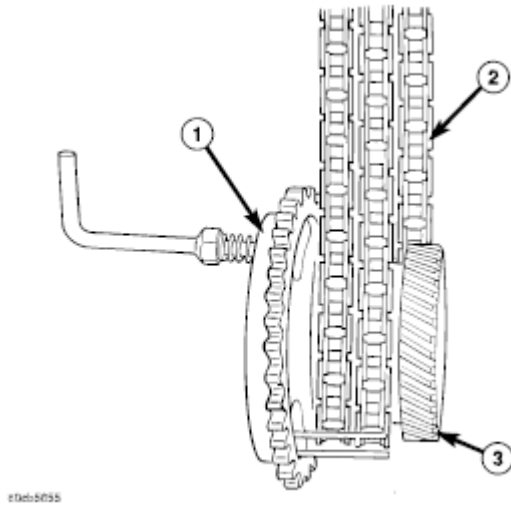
Identifying Secondary Timing Chains And Special Tool 8429 Timing Chain Holding Fixture
